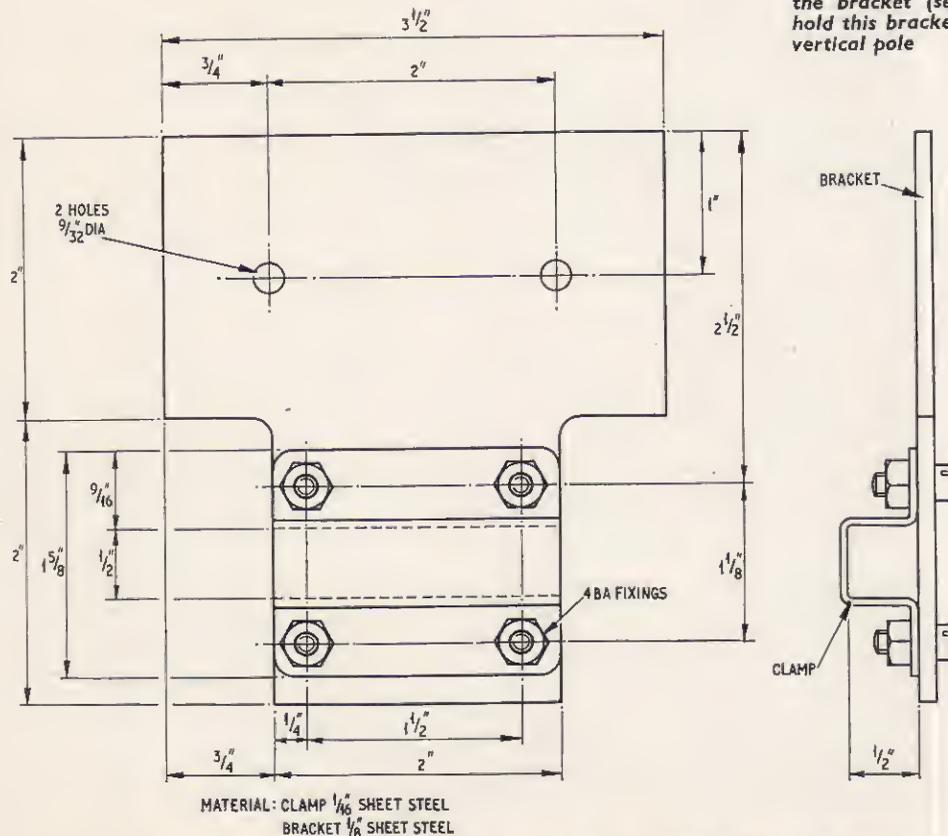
Details of the clamping plate and bracket. All parts should be well protected by painting with a primer, undercoat and gloss finish before assembly
